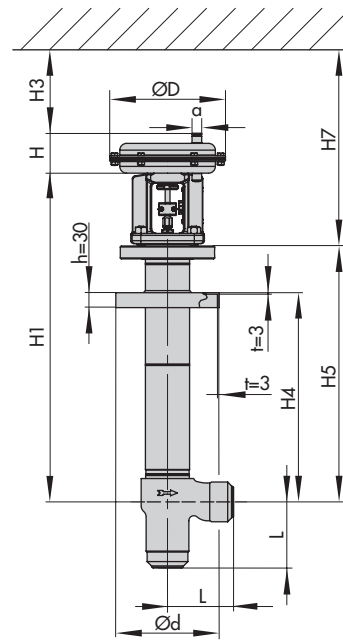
Type 3248-1 Angle Valve with stainless steel body
